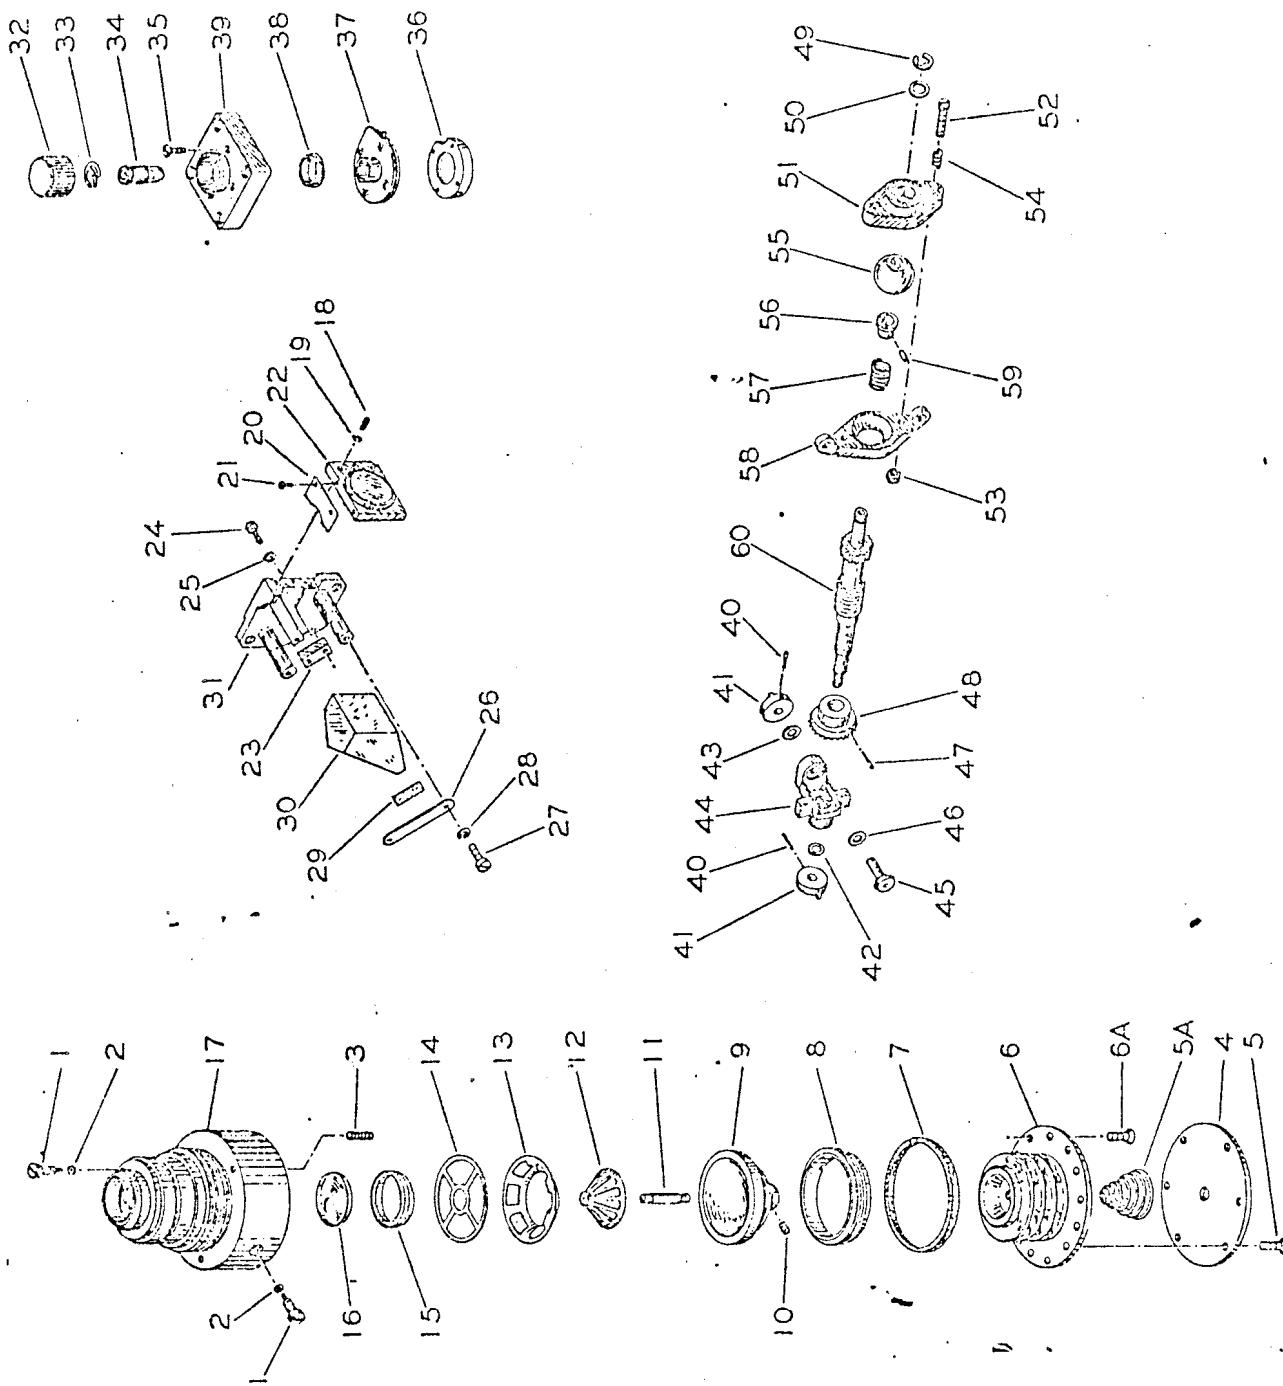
Mirror Unit, Prism and Lens Mount Assembly, Lamp and Housing Assembly, and Main Shaft Assembly
